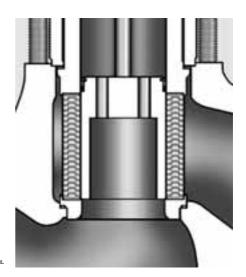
WhisperFlo® Cage in 4- and 6-Inch Design ED Valve
